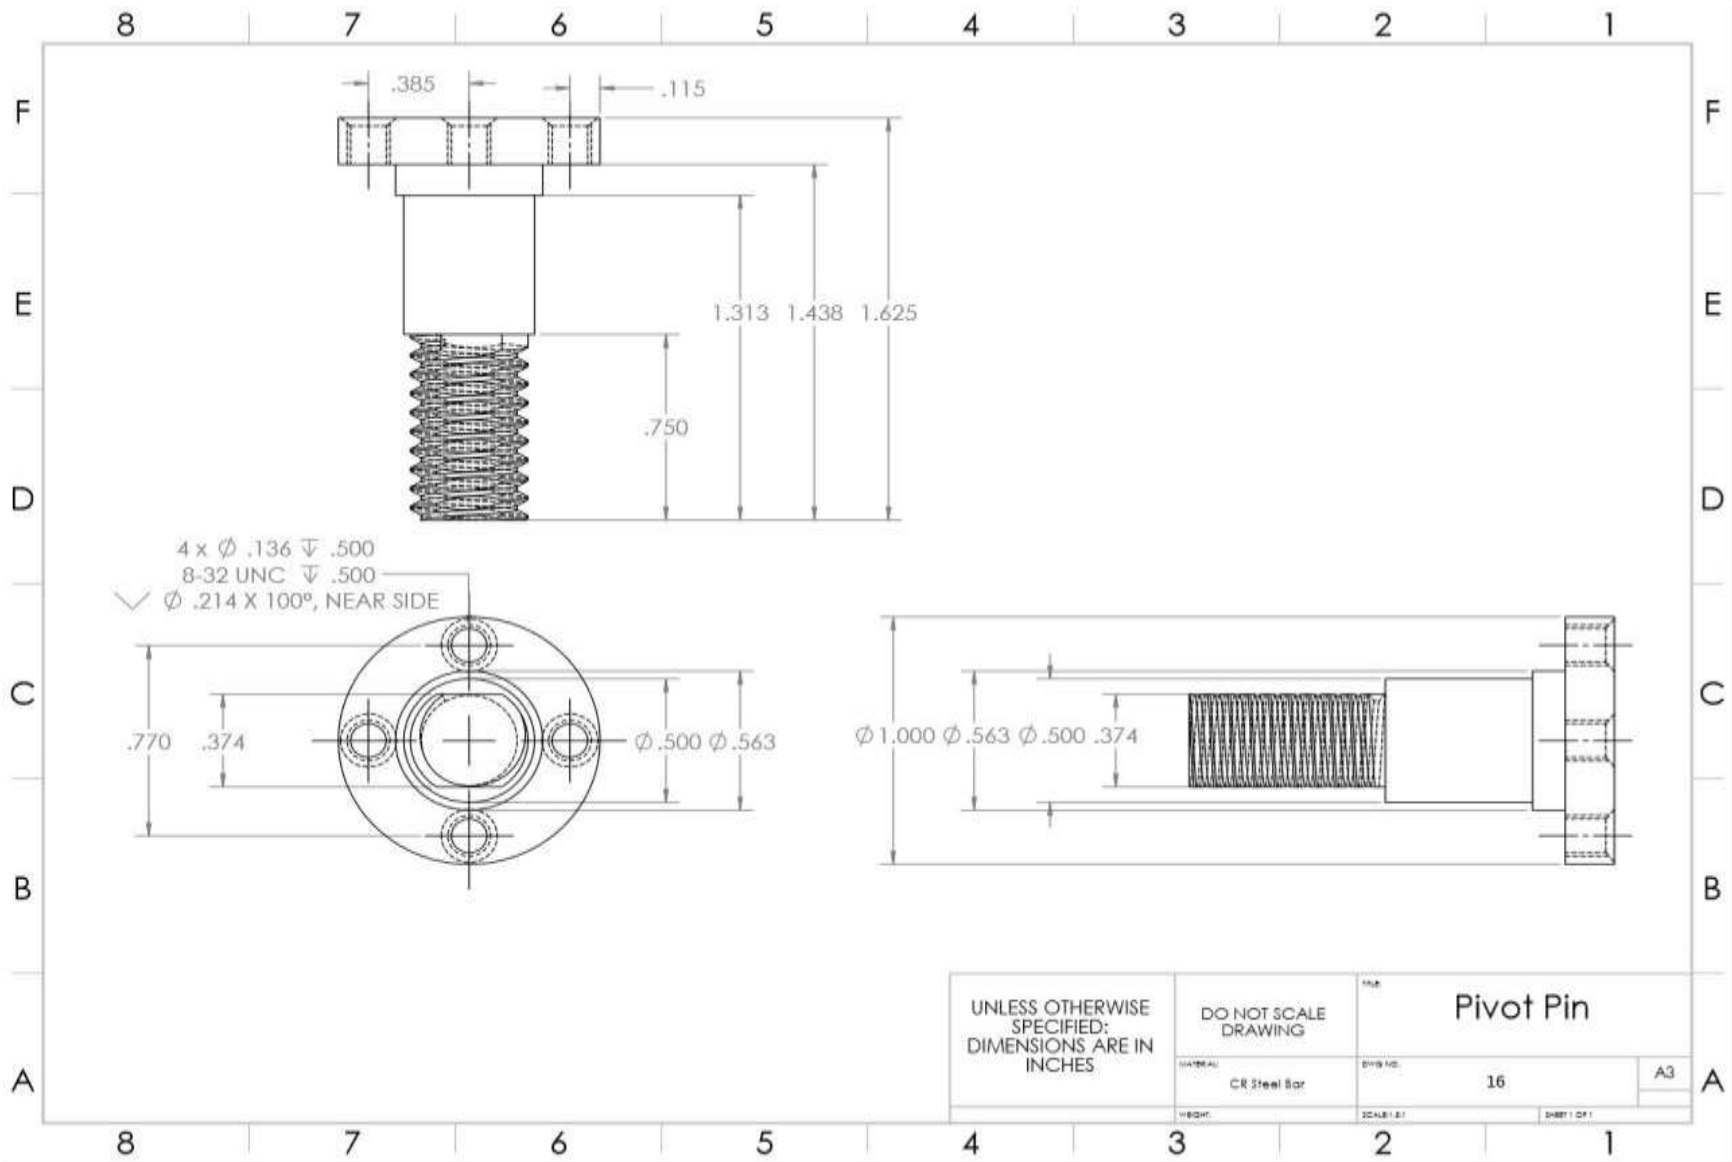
14. Mechanical Drawing of Pivot Pin.
